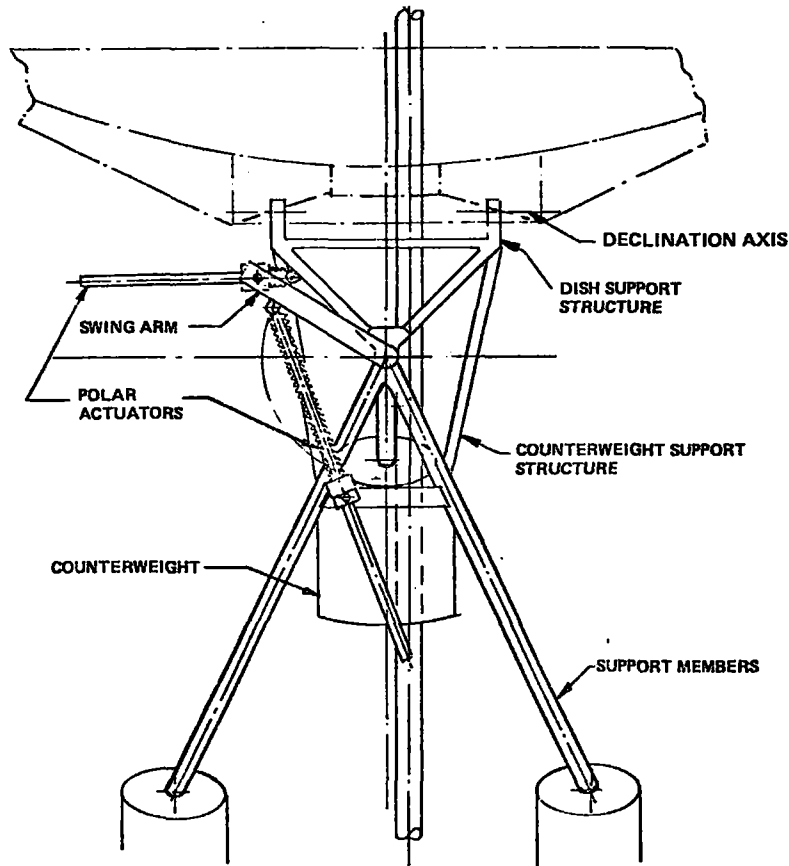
View of Polar Axis of Dish Drive Mechanism
